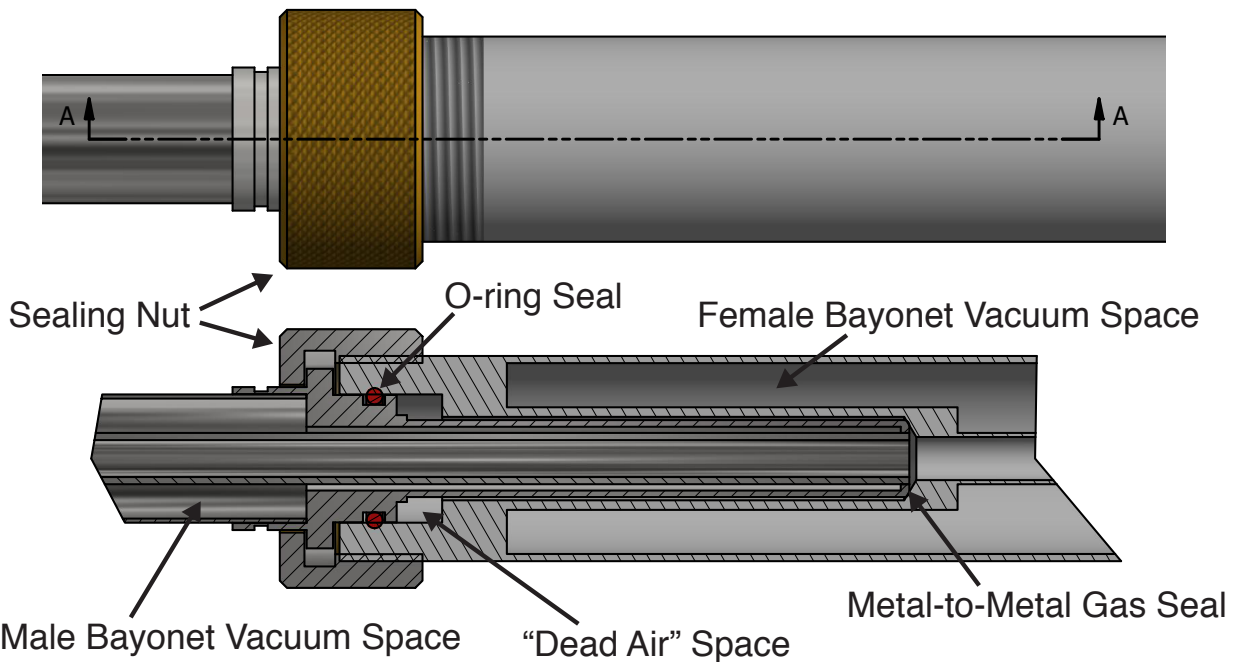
Diagram of Precision Cryogenics bayonet assembly. This assembly is used to prevent helium leaks at the gas input of the probe.
